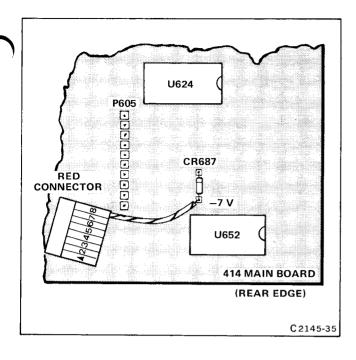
Adding wire to -7 V on Standard 414 Main board.
